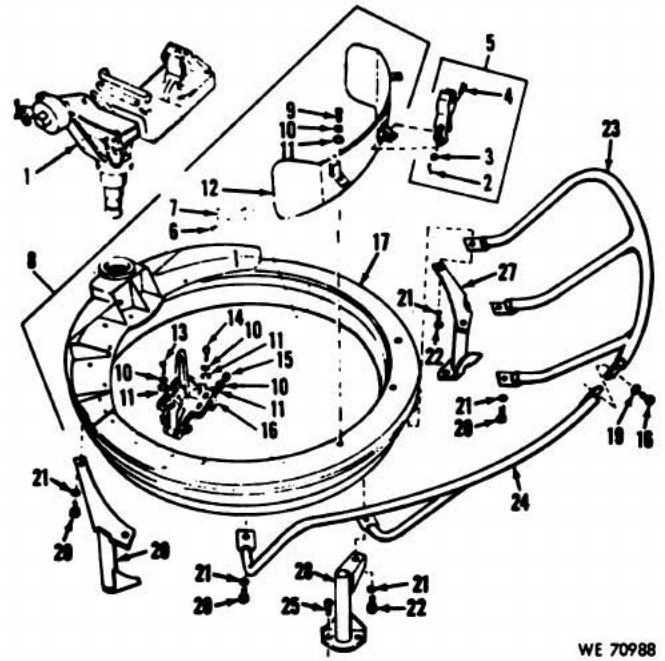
Mount, gun, ring, M68E1 w/supports—7976450—partially exploded view.
